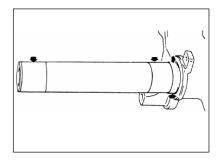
Inspect Rocker arm Axle Journal and Oil Seal Seat Surface
